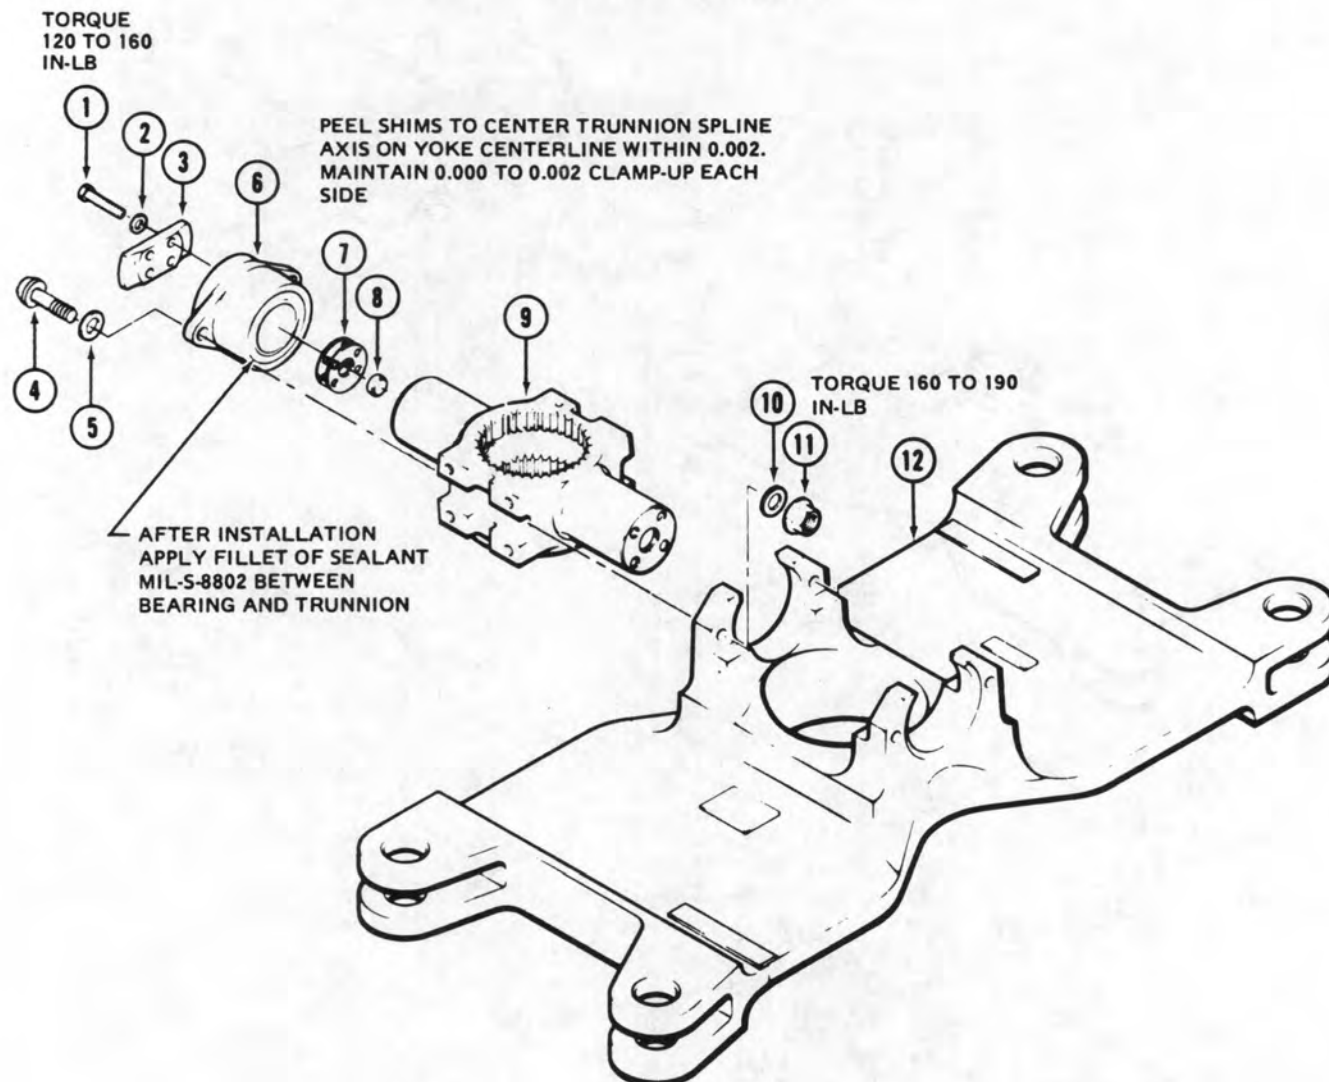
Main Rotor Hub Yoke Extension and Grip Assembly (Sheet 1 of 2)
